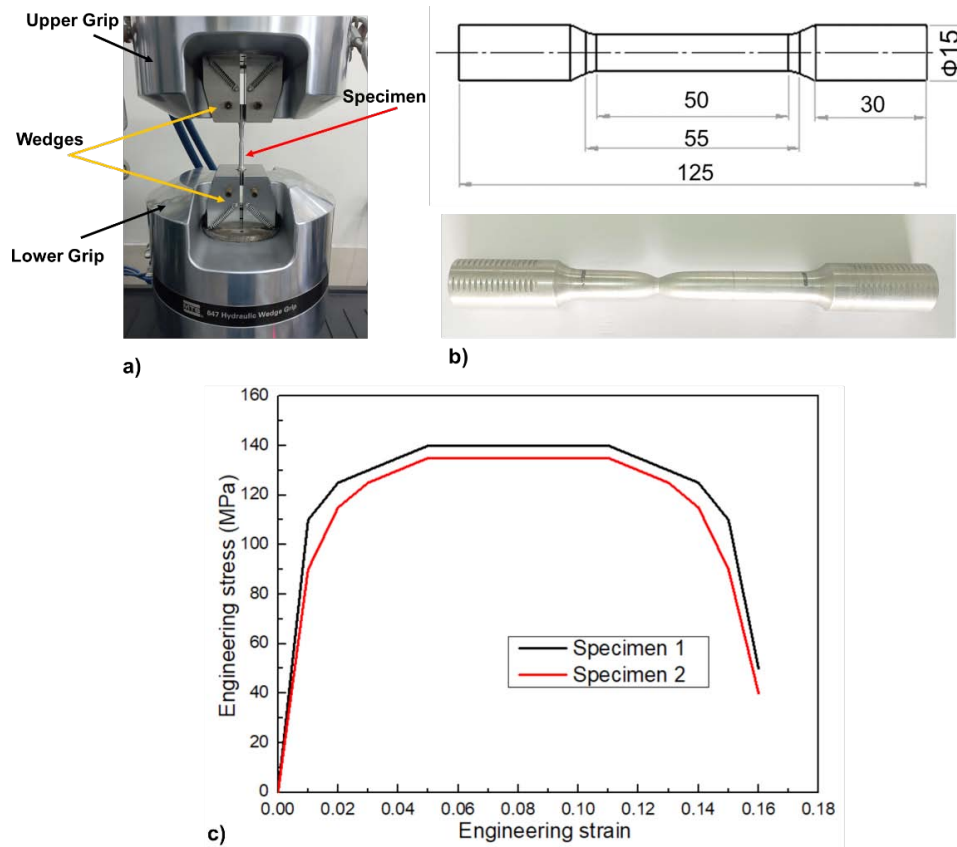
The tensile test device (a), specimen and fractured specimen (b), and engineering stress-strain curve (c)
